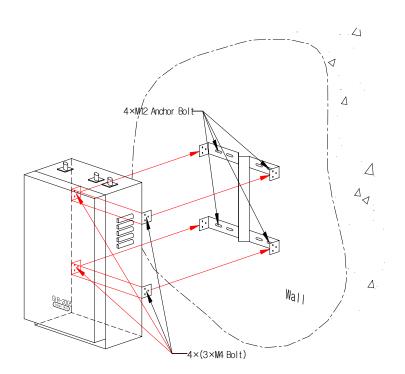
Assemble Wall Bracket with GIR-2005 Chassis Bracket
